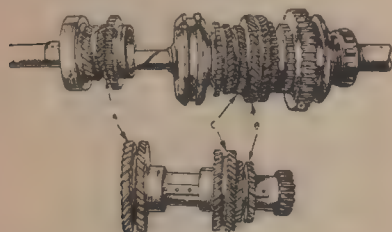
Typical synchromesh layout in which double helical gears are used.
